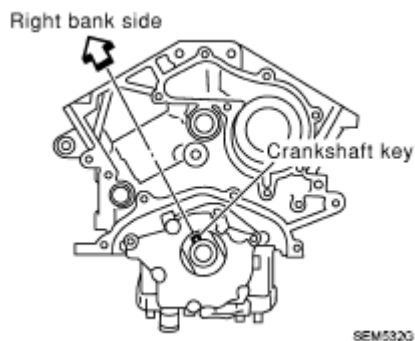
Identifying Crankshaft Key Should Line Up With Right Bank Cylinder Center Line
